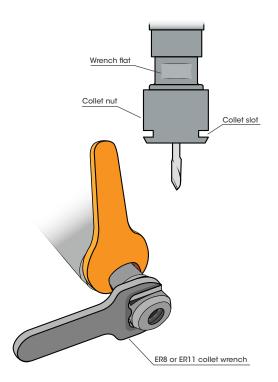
Correct insertion of both the wrench and the ER8 or ER11 collet wrench to remove or secure the collet nut.
